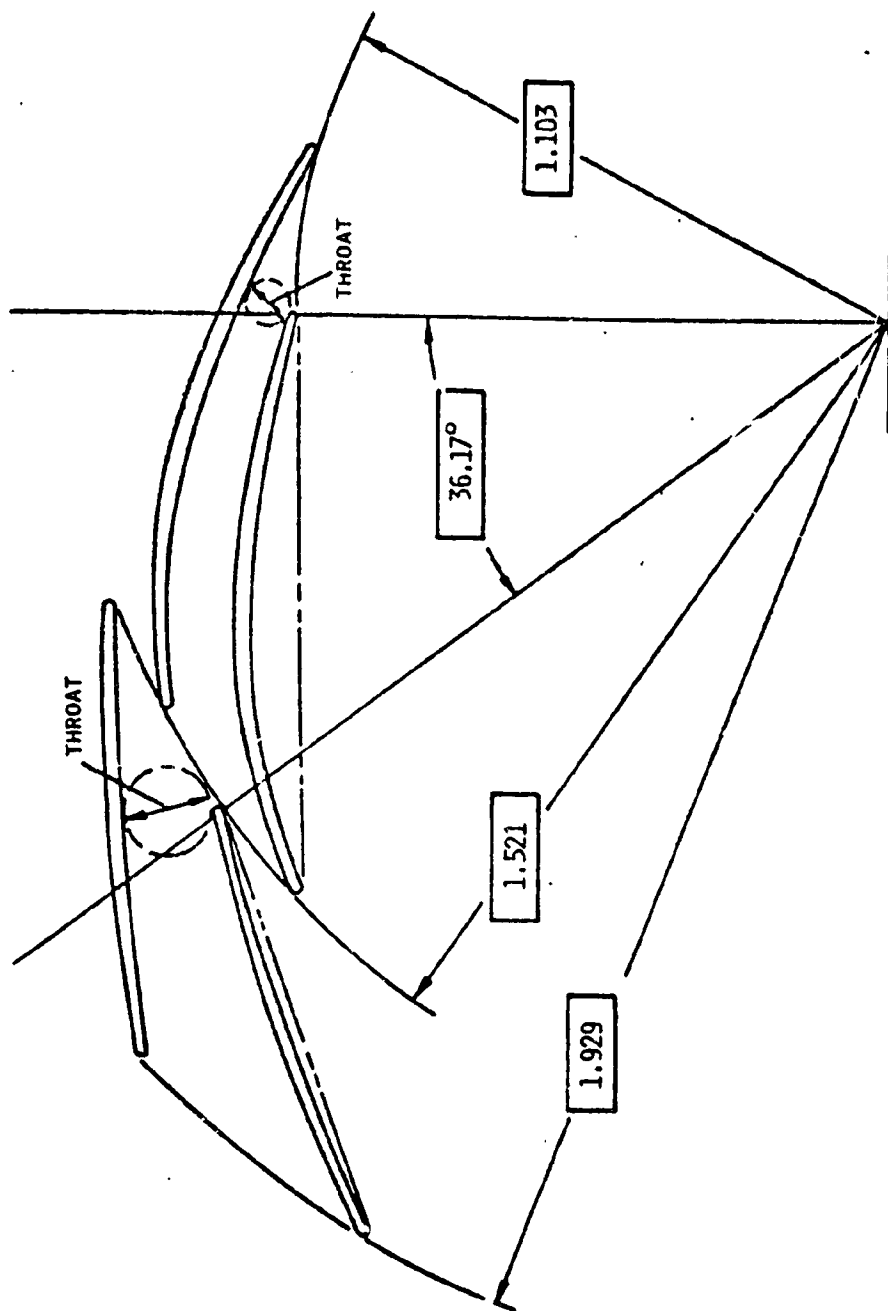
Mini-BRU Compressor Tandem Diffuser Circumferential Positioning.
